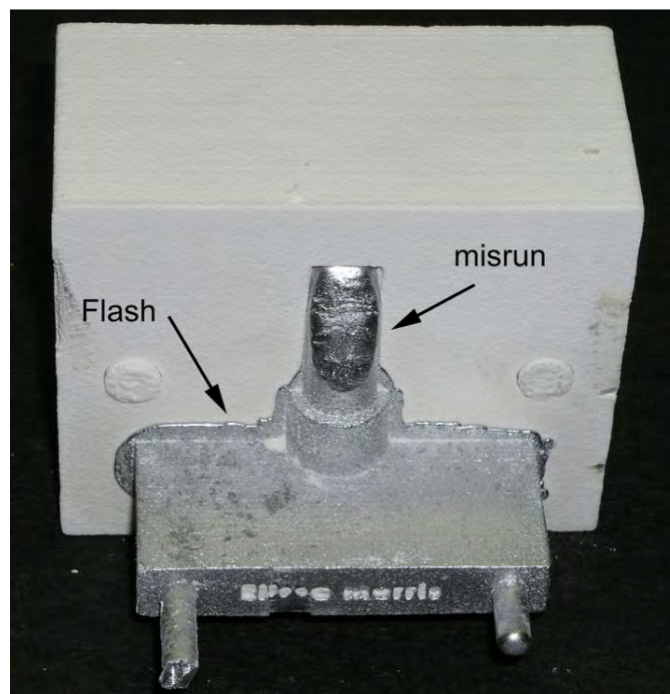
Figure shows a portion of the mounting stand protruding out of the mold. Misrun and flash were observed on this casting as identified by the arrow.
